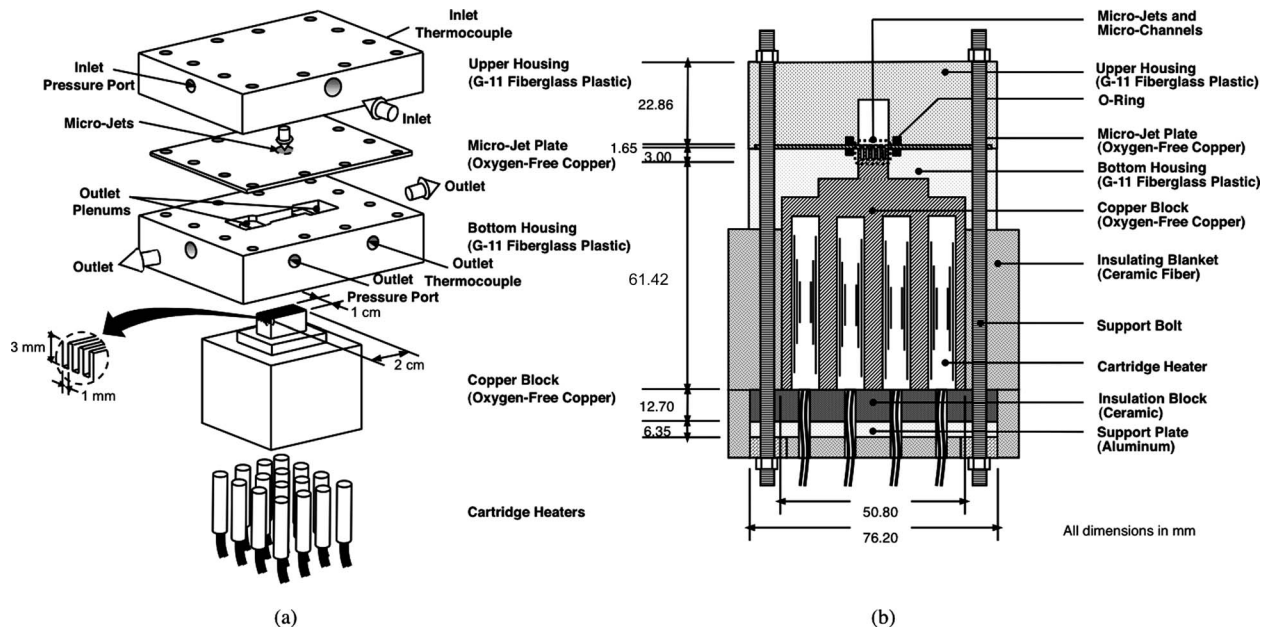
(a) Test module construction and (b) cross section of module assembly
